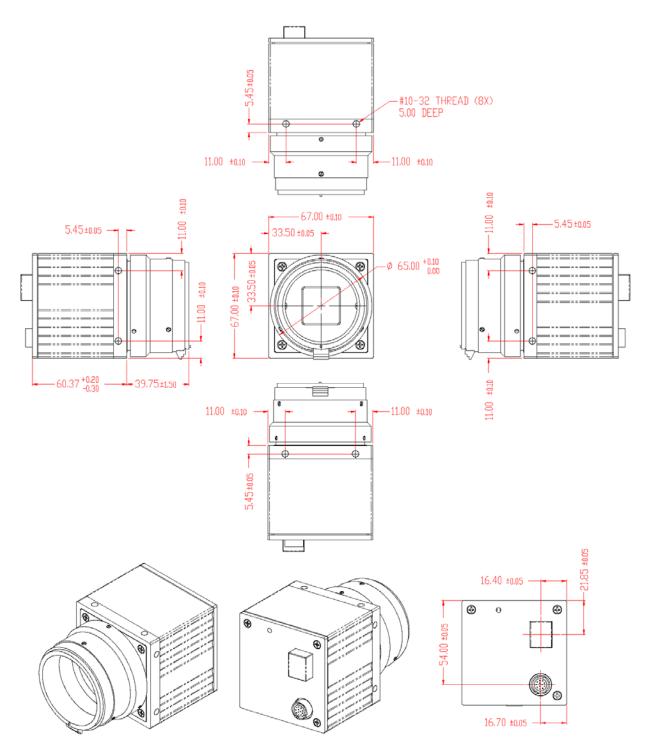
IPX-4M15-G (Silver Body) Dimensional Drawings
